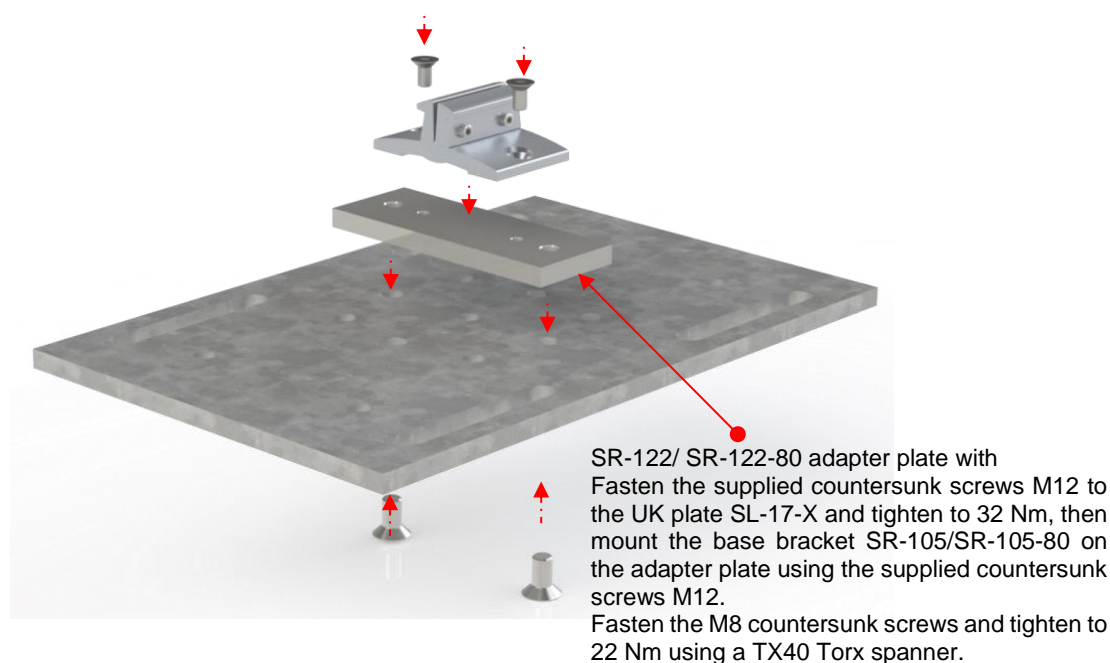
Mounting base bracket SR-105 on adapter plate SR-122 for substructure plates SR-017
